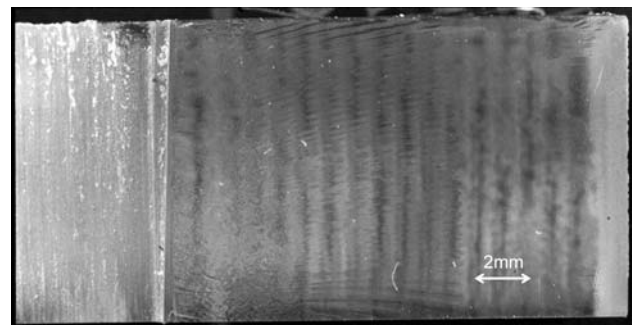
The fracture surface of a PMMA specimen tested under CAL. The direction of crack growth was from left to right, and the precrack is visible on the left of the picture. The fracture surface is initially smooth, but develops a longitudinal pattern at higher ΔK, and the fast fracture region to the right is very smooth
